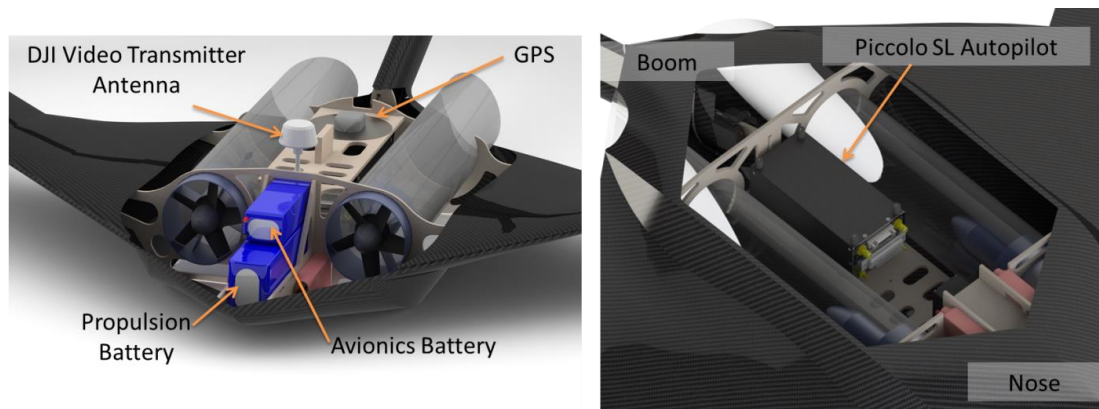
Inside payload layout from top (left) and bottom perspective (right)⁷.
